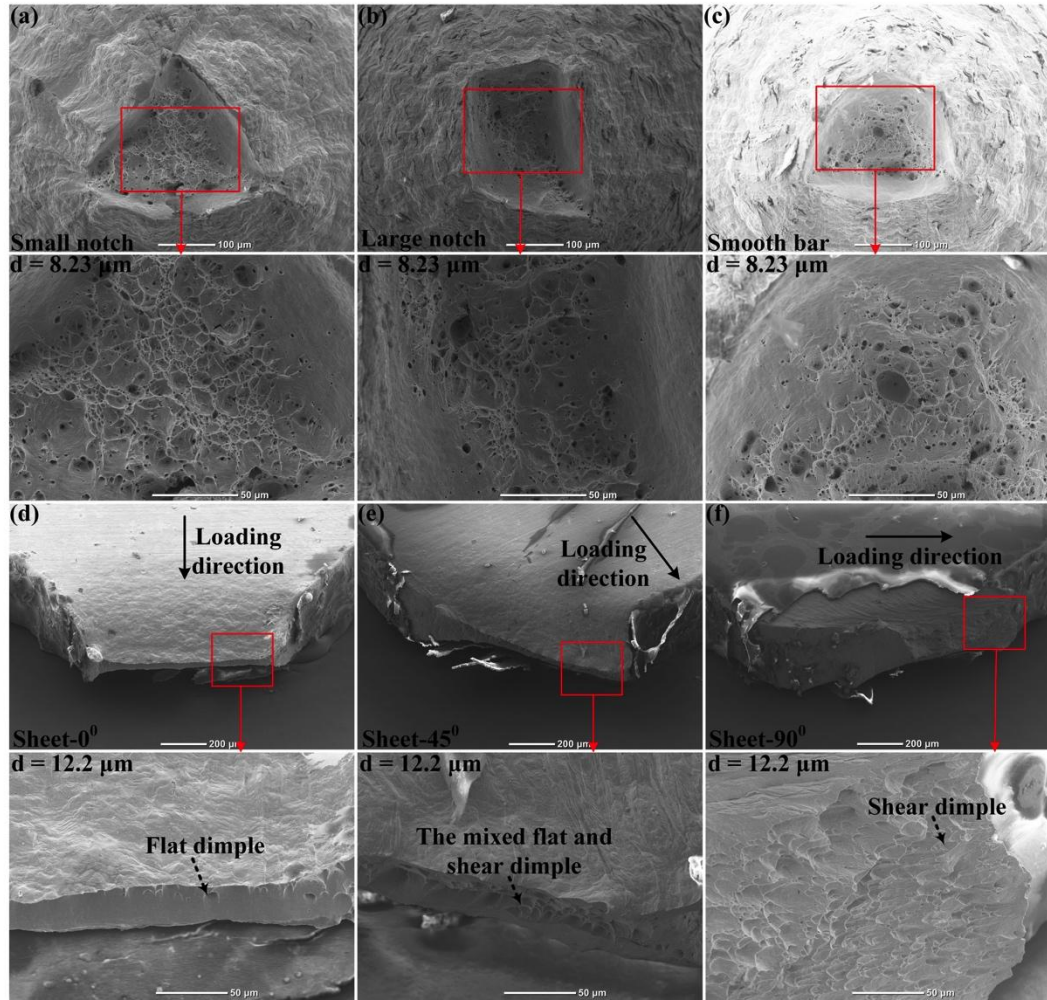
SEM fractographs of round and sheet specimens with different geometries. (a) Small notch; (b) Large notch; (c) Smooth notch; (d) Sheet-0°; (e) Sheet-45°; and (f) Sheet-90°.
